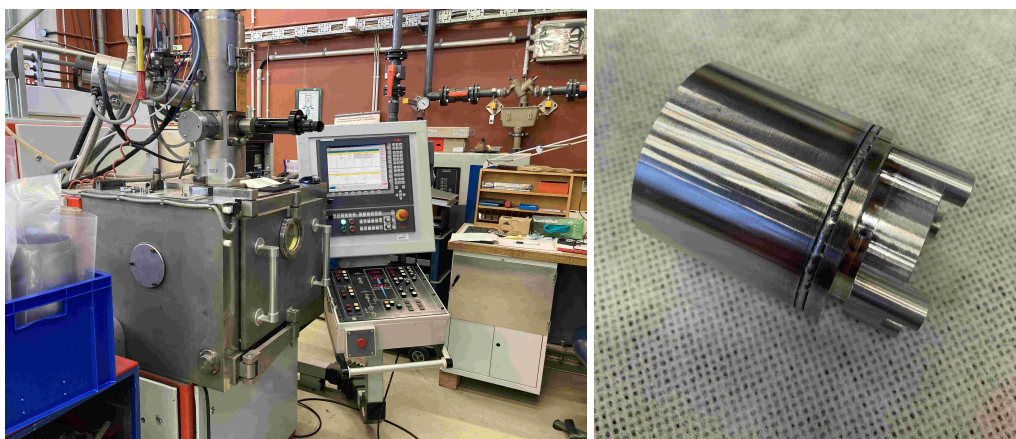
Electron beam welding of the cold moderator vessel. Left: EB welding machine. Right: welded cold moderator vessel.
